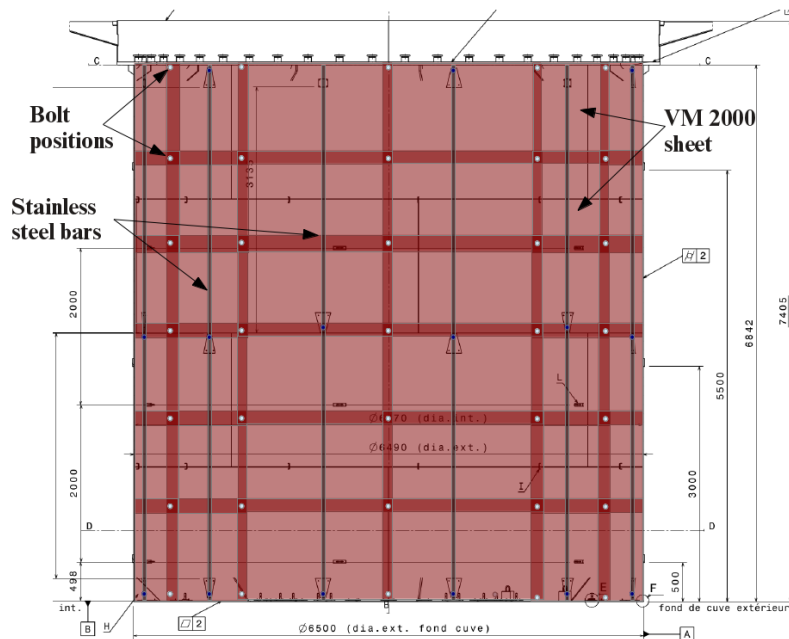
Sketch of the veto side wall with marked VM 2000 sheets, bolt positions and stainless steel bars. For details see text.
